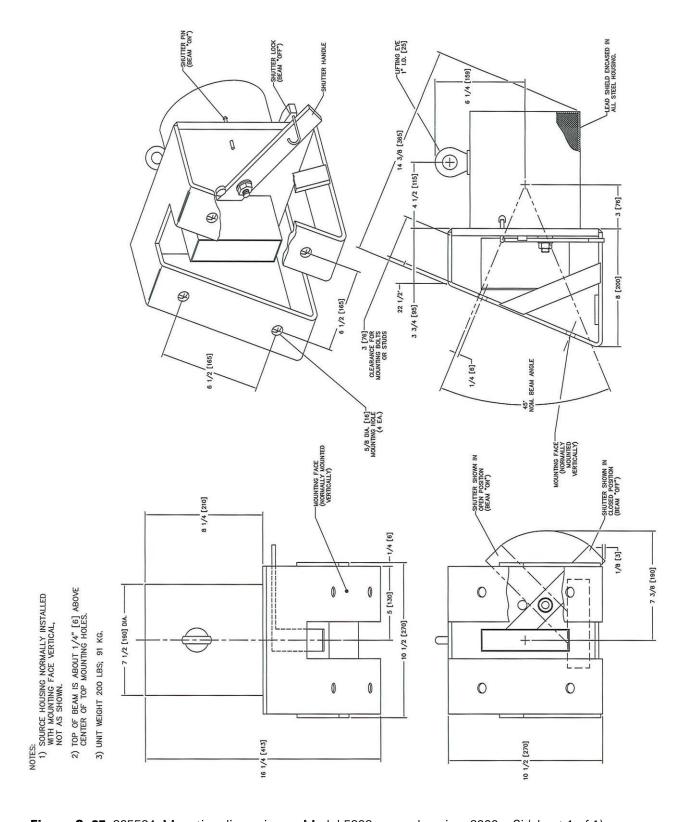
865524: Mounting dimensions – Model 5208 source housing, 8000 mCi (sheet 1 of 1)
